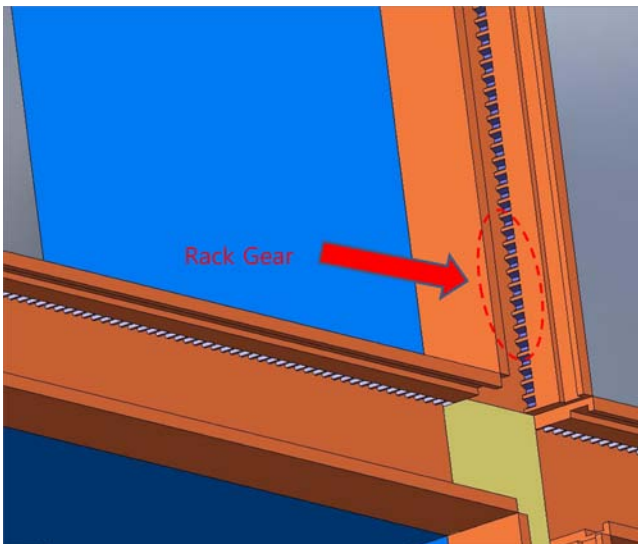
Guide Rail configuration 1 , using Rack gear.
